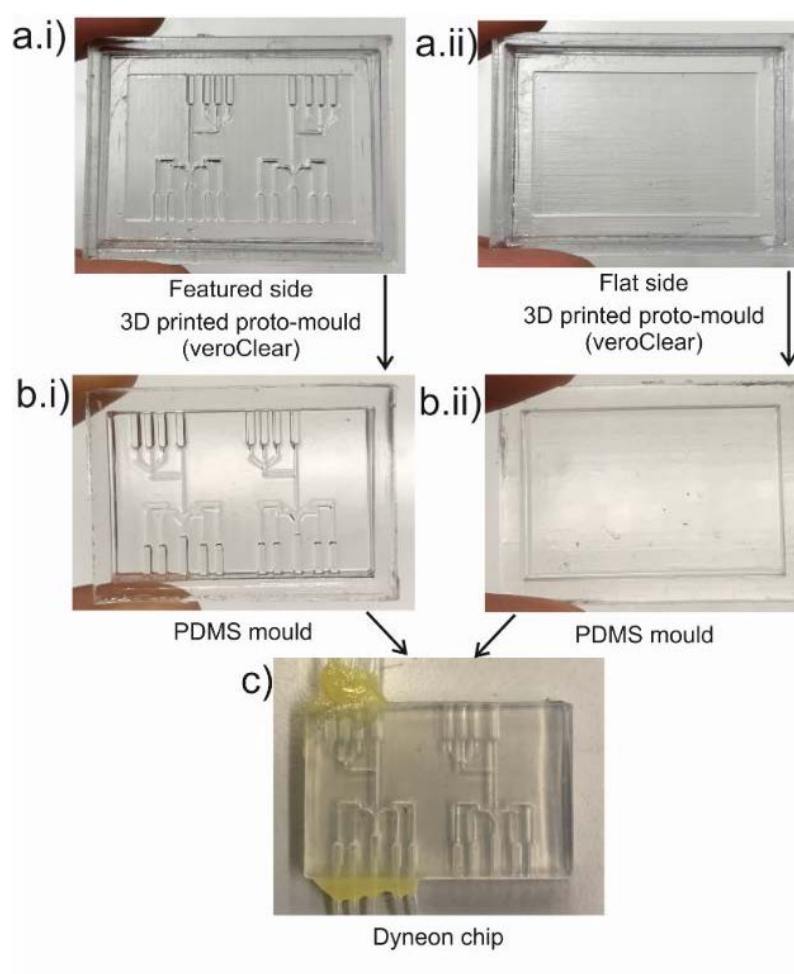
Fabrication steps of Dyneon microfluidic chip. (a) 3D printed proto-mould for curing PDMS showing (i) featured side and (ii) plain side. (b) PDMS mould. (c) Finished Dyneon chip with PTFE tube (0.5 mm inner diameter) inlets and outlet.
